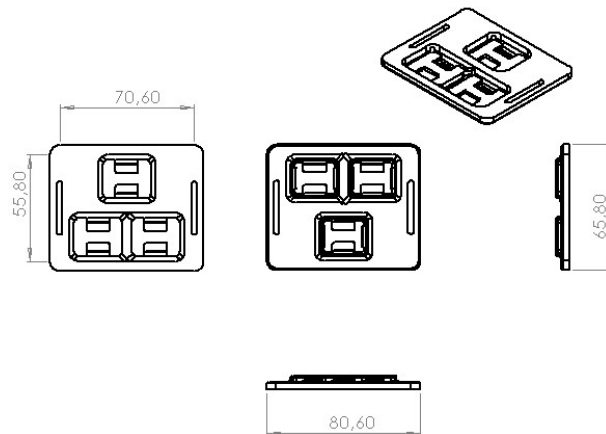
In this figure a technical drawing of the sensor holder is shown.
